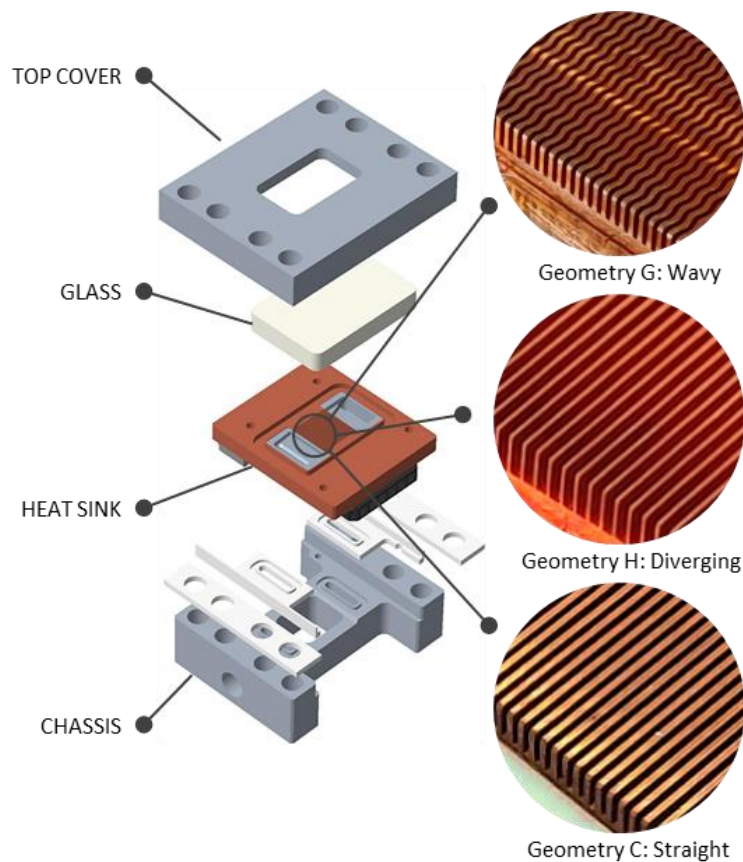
Exploded view of the test section showing the heat sink, chassis, and microheater.
